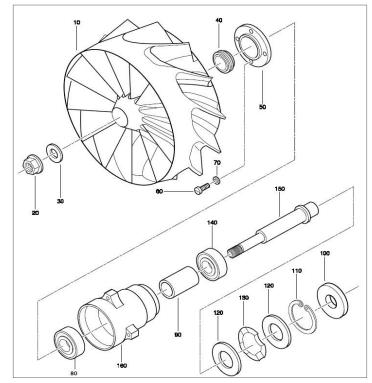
Cooling fan assembly overhaul parts [Source: Technofan]
